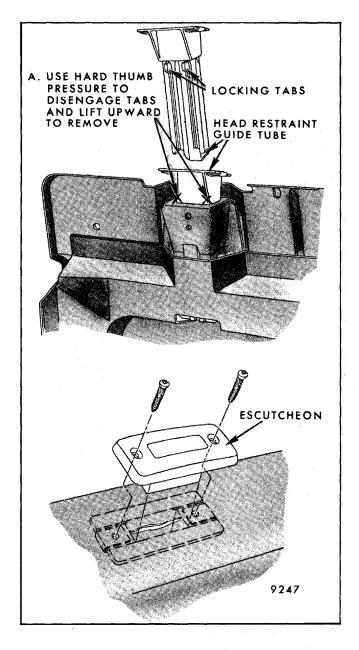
Head Restraint Guide Tube Removal - A, B and C Styles
